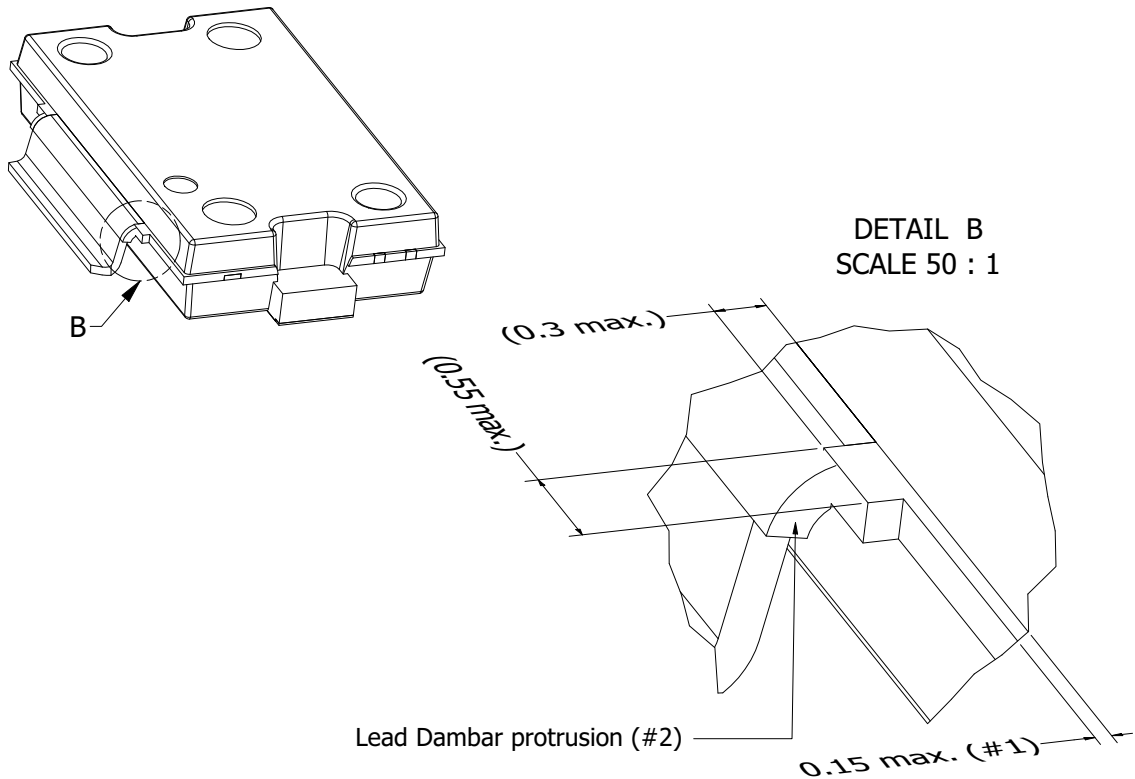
Package outline STO-270-2G-1 (sheet 1 of 2)
